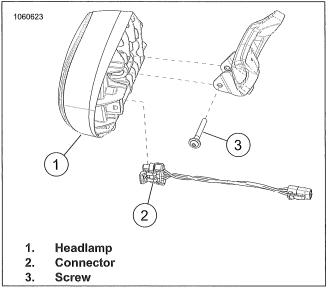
Oblong Headlamp BULB REPLACEMENT: HORIZONTAL
